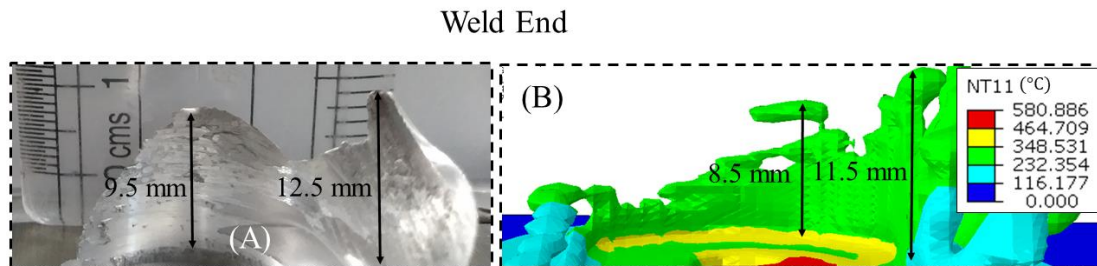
Bird-eye view of the flash formation along the stirred zone at the weld end for AA6061 with a conical tool: (a) experimental and (b) numerically calculated at 1200 rpm, 90 mm/min, and $P_d \sim 0.7$ mm
